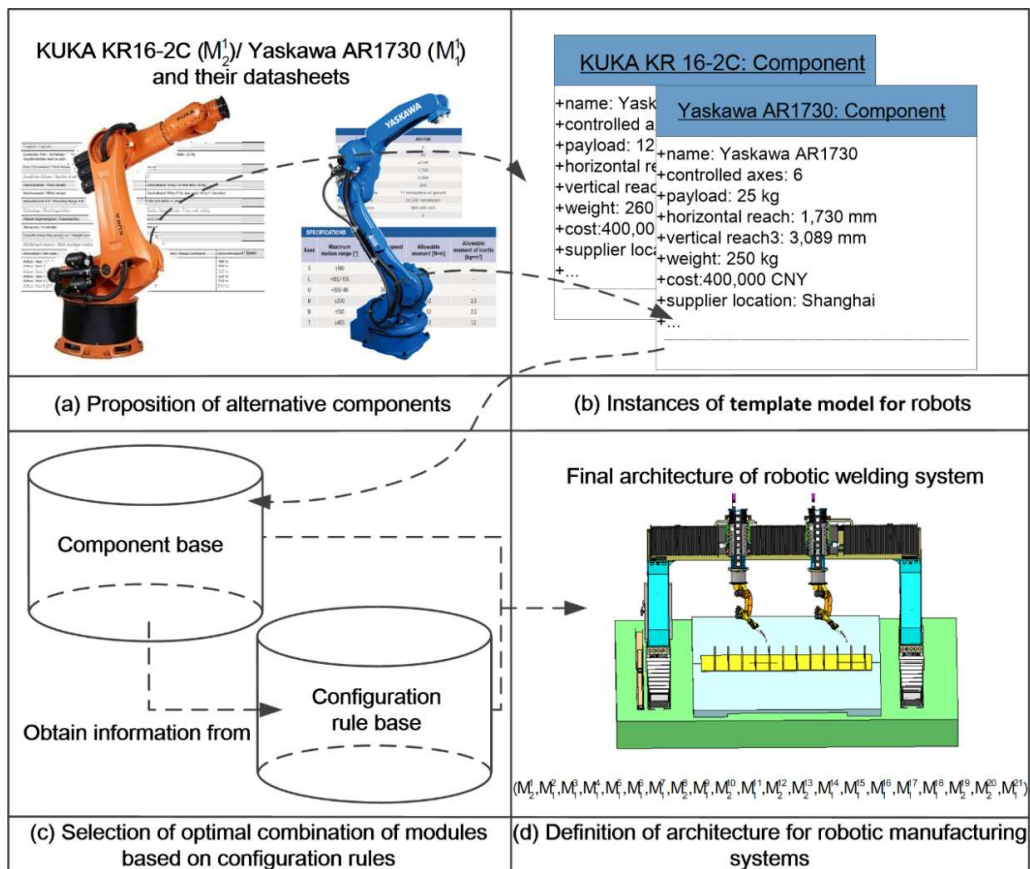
Component information representation and final component selection - example of robotic welding system
